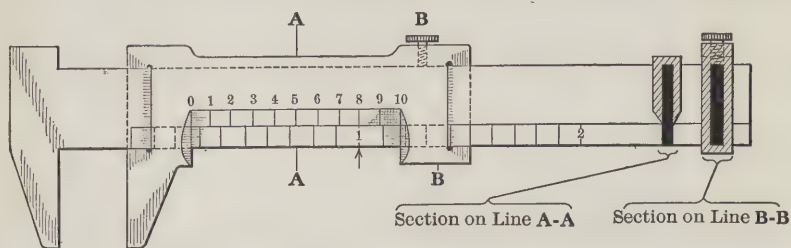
DEMONSTRATING THE PRINCIPLES OF VERNIER CALIPERS
